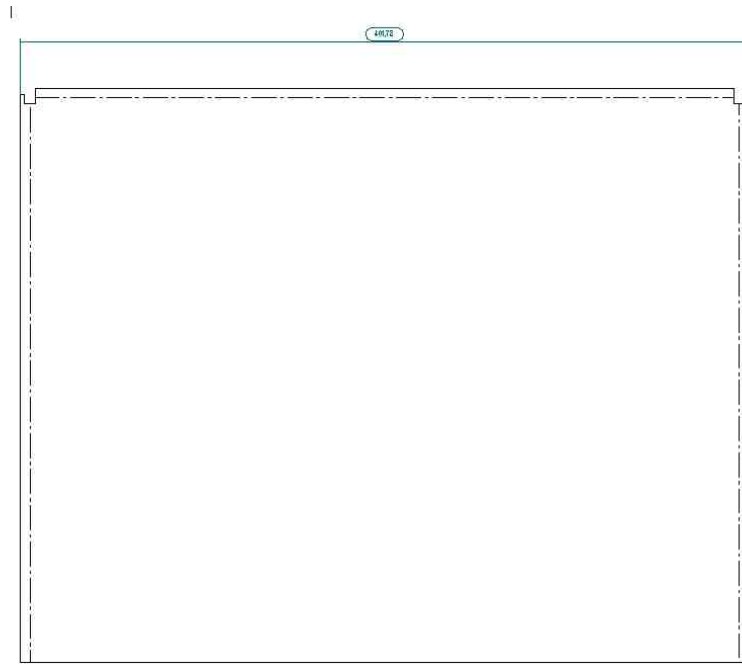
Detail folded open drawing extracted from Solid Edge: Side, left
